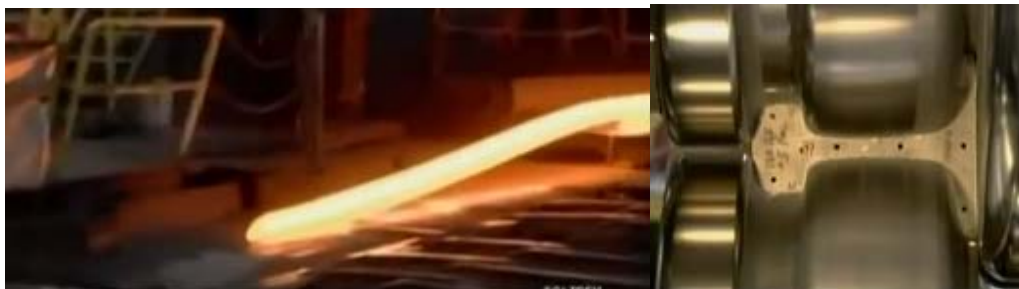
The long product of steel passing from the rolling mill and the T-shape rollers for its final shape.
